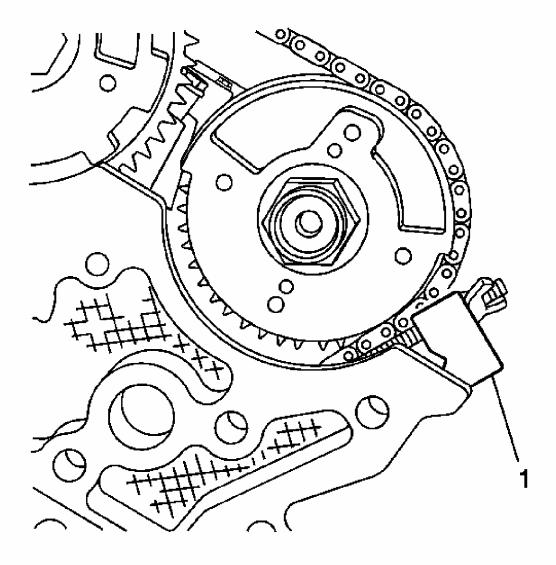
Positioning EN 46327 On The Cylinder Head Courtesy of GENERAL MOTORS CORP.
